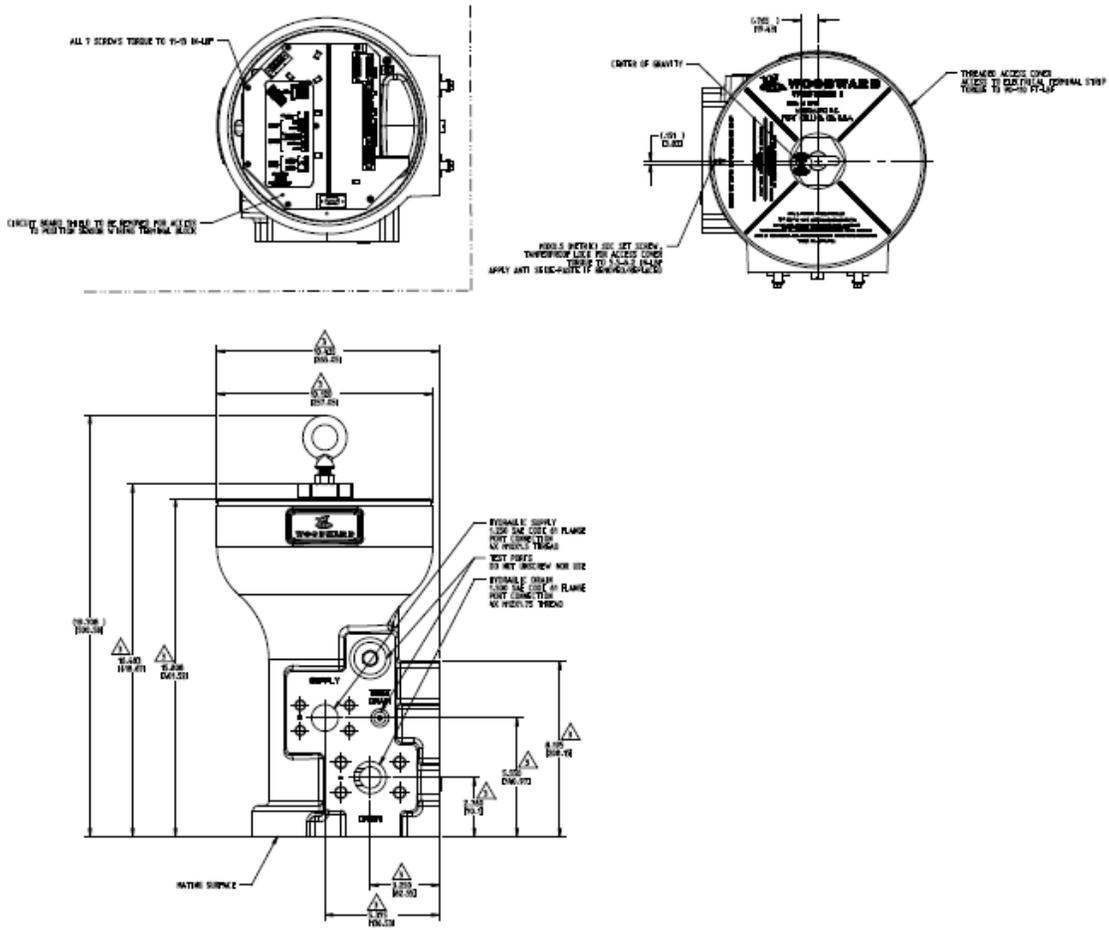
Typical VS-I Remote Servo Installation Dimensions
